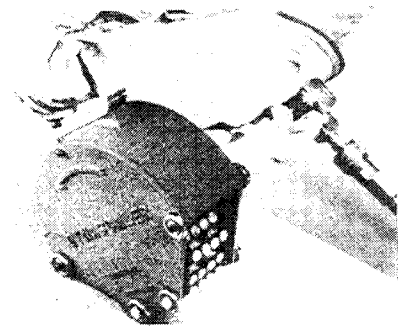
•14: Rotary Impact Power Tools - Roto-Peen Equipment
